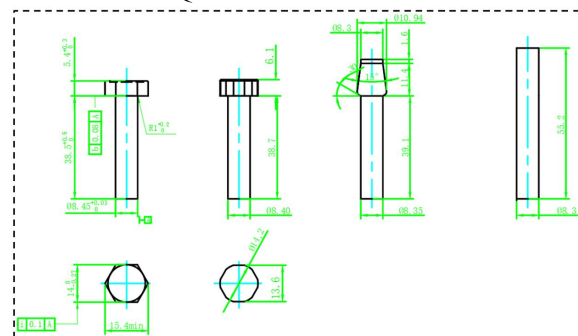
Forming Process Drawing of MJ4×22A Specification Bolt Based on Q/Y 1073.4-2021
